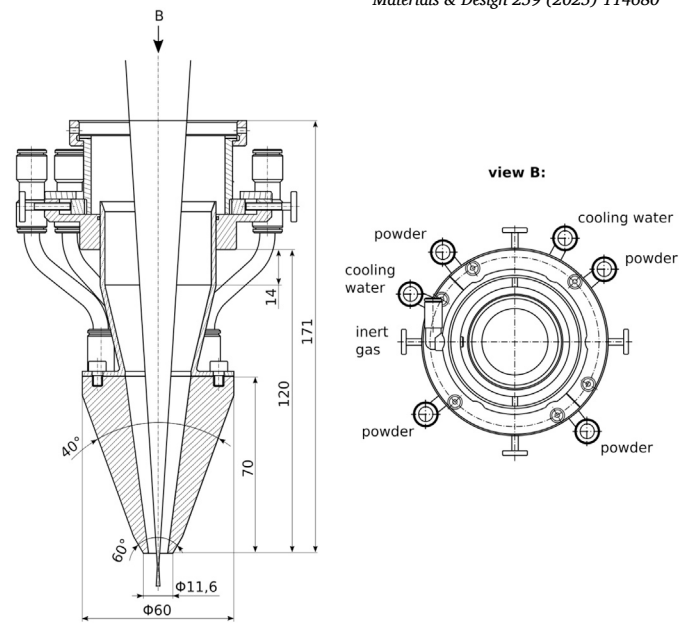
Dimensional details of the Fraunhofer COAX 12V5 deposition head.
